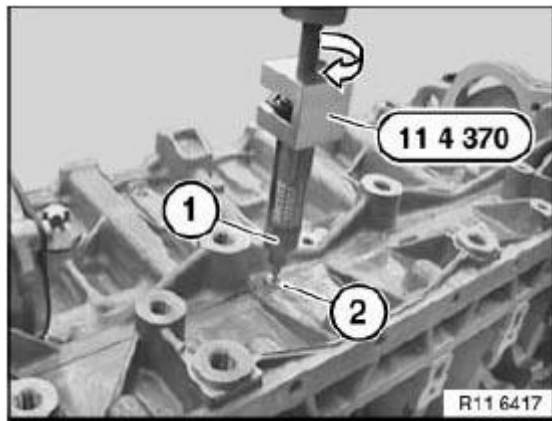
Inserting Sealing Compound With Special Tool (11 4 370)
